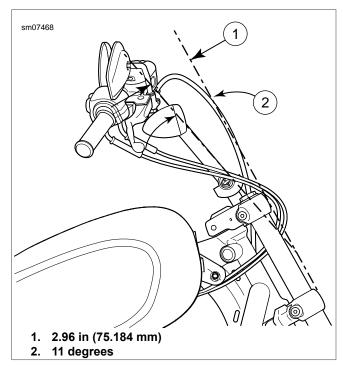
XL 1200CP/CB Mini-Ape Handlebar Angle
